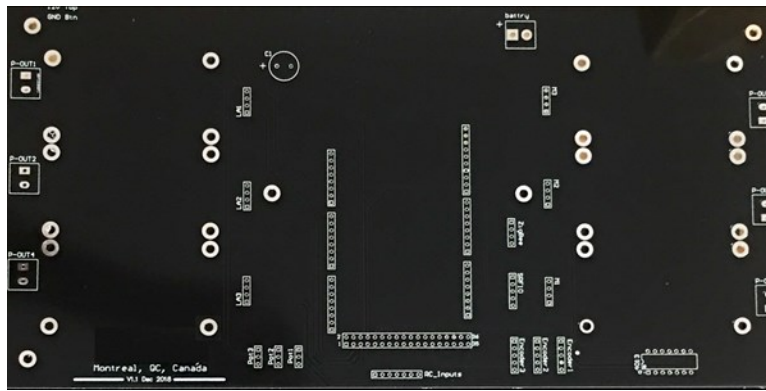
THE PCBs BEFORE COMPONENT SOLDERING
